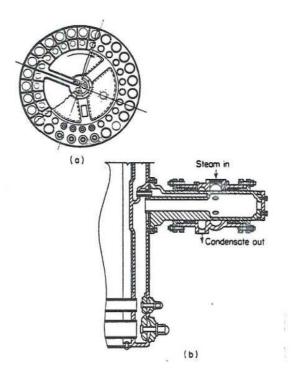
Rotary steam joint for a standard steam-tube dryer. (a) Section of cast steam manifold. (b) Section of manifold and steam joint.
